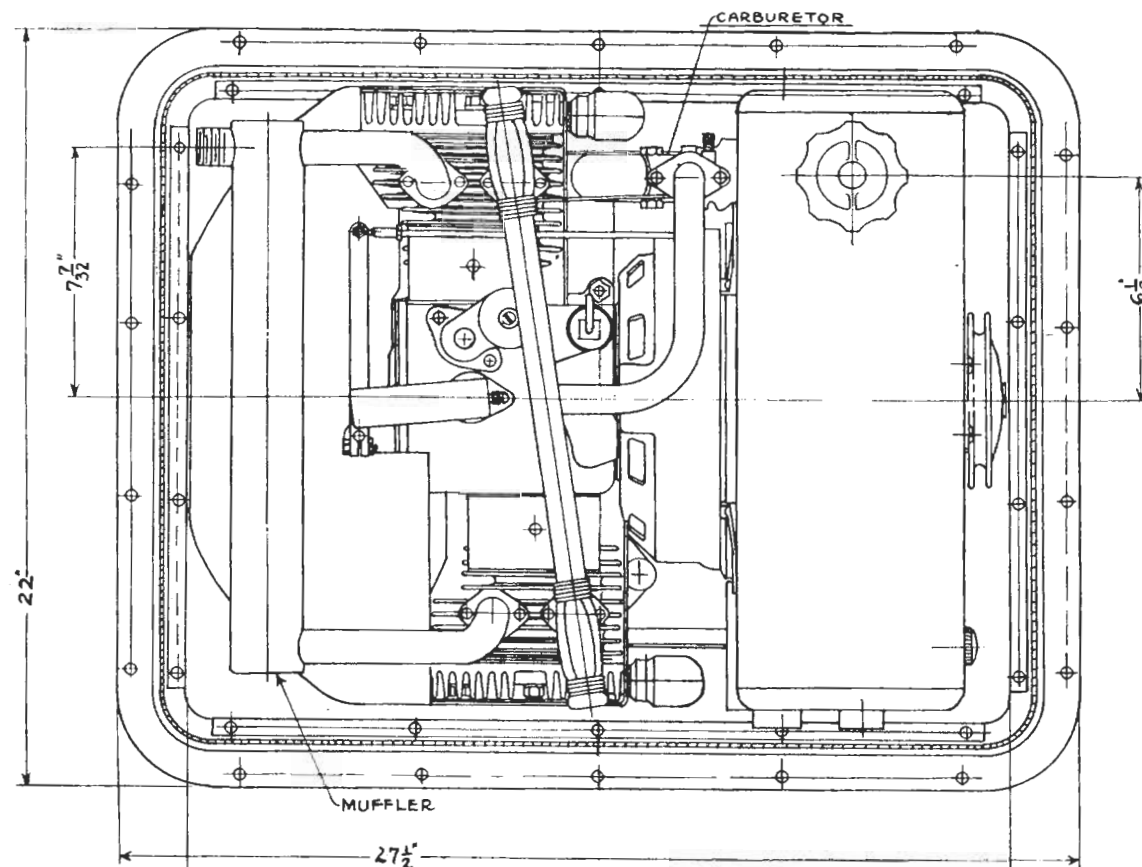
Outline and Mounting Dimensions, Engine Driven Generator Set, Type CDO-73004 (Dwg. W-7300488)
